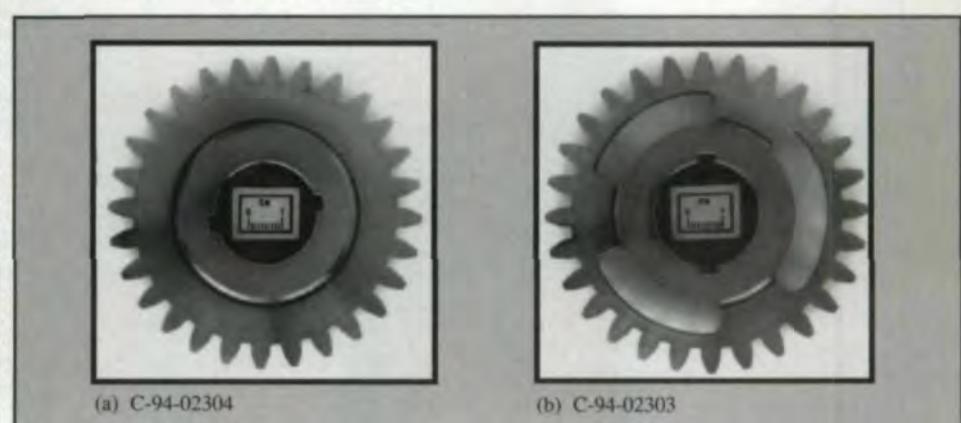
Test gears used to determine effect of rim thickness on crack propagation.
